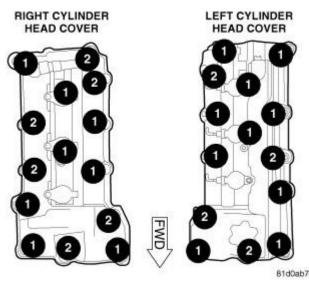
Cylinder Head Cover Fasteners Courtesy of CHRYSLER LLC
